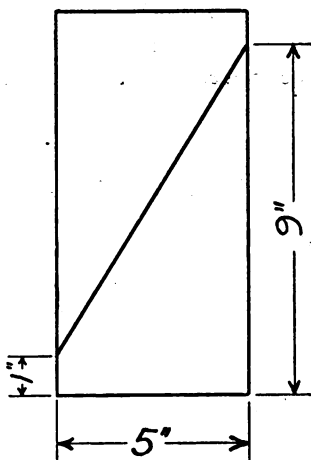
Side Elevation of Prism, Showing Diagonal Joint
